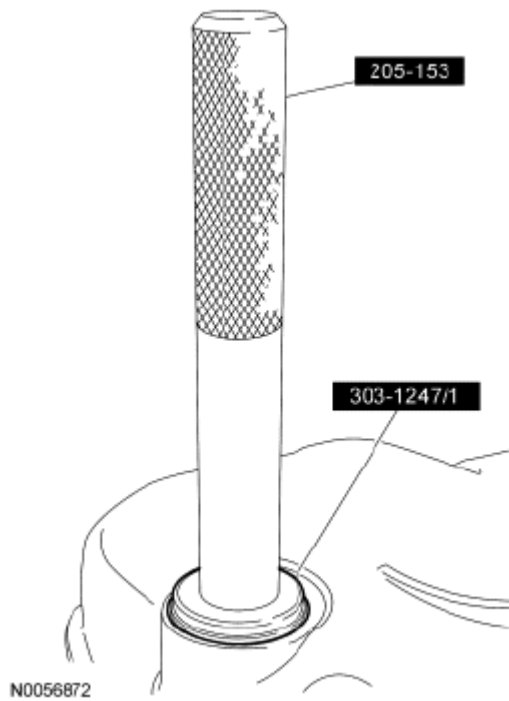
Identifying VCT Spark Plug Tube Seal Remover And Handle
